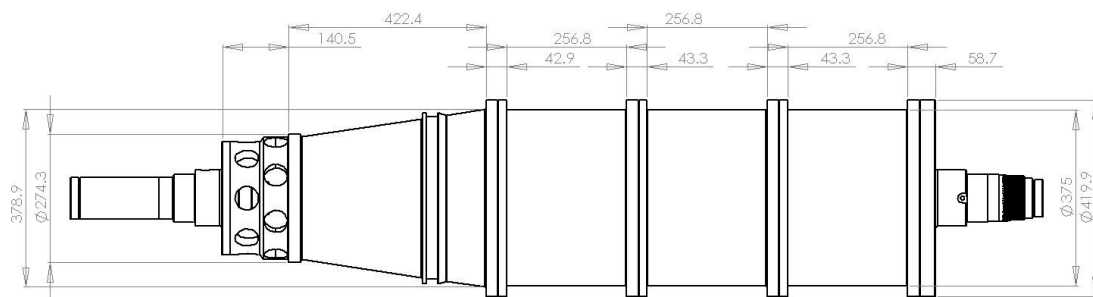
GTech-Bellmor 1456 Centrifuge Decanter bowl assembly (mm)
